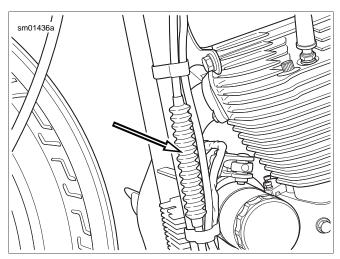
Clutch Cable Adjuster Location: XL Models
